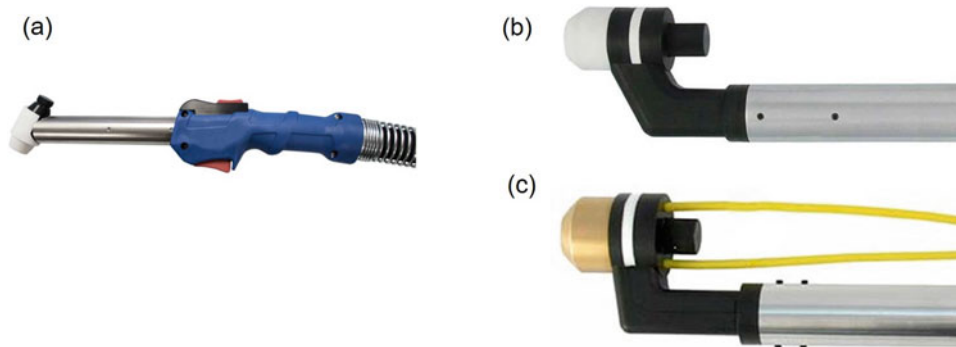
Photograph of PTA Durmat Torches (a) PT-150 M manual, handheld torch, 150A, 30 g/min; (b) PT-300 AUT machine torch, 280 A, 75 g/min; (c) PT-400 machine torch 300 A, 100 g/min. [2017 DURM Verschleiss-Schutz GMBH]
